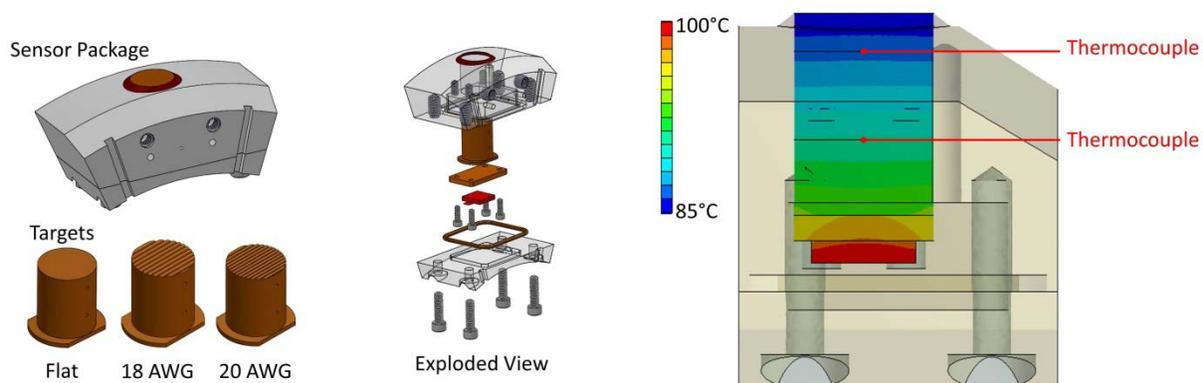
Design of sensor package showing assembled components and ability to change target surfaces (left), thermal finite element model of sensor package design (right).
